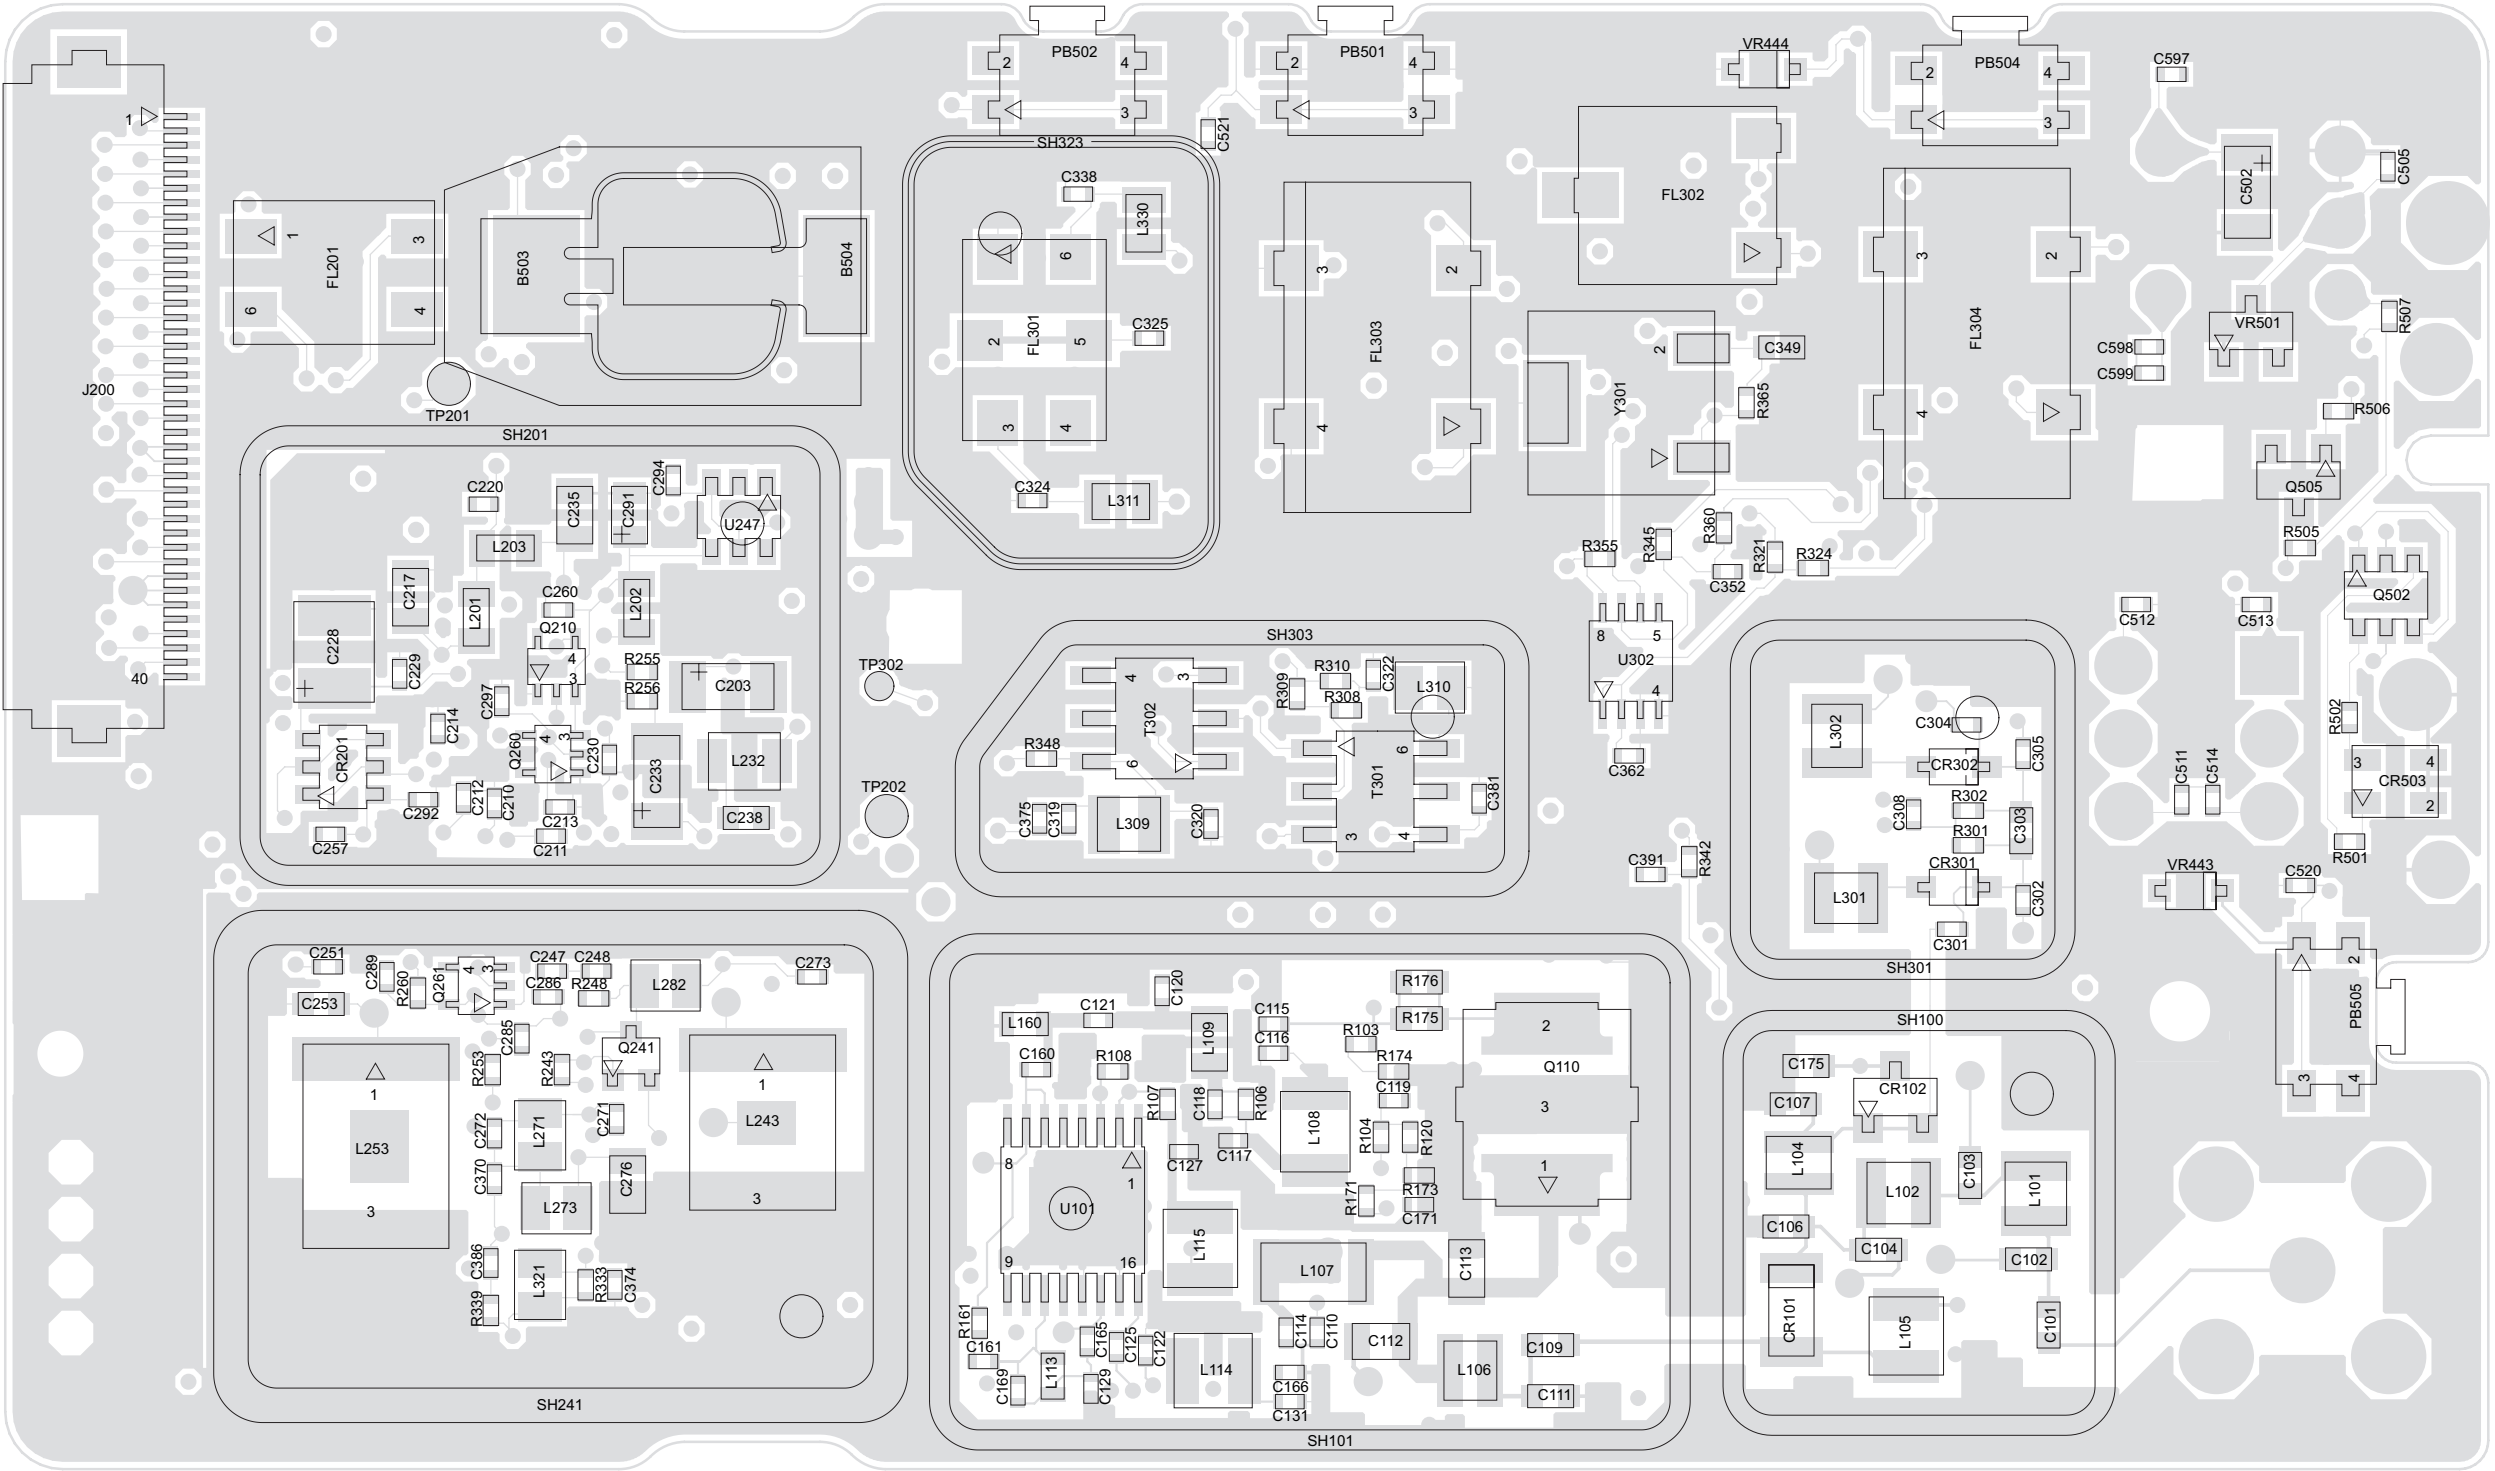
UHF (403-470MHz) Main Board Top Side PCB No. 8471441L01
